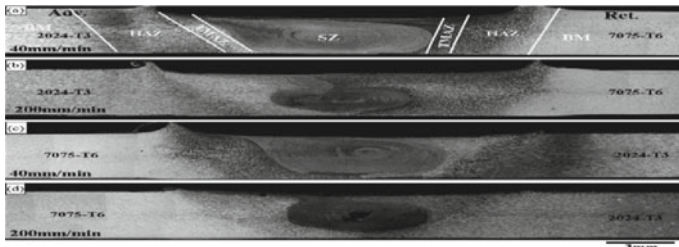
Macrostructure of FSW dissimilar aluminum alloys AA2024 and AA7075 at different welding position and linear velocity [10]
